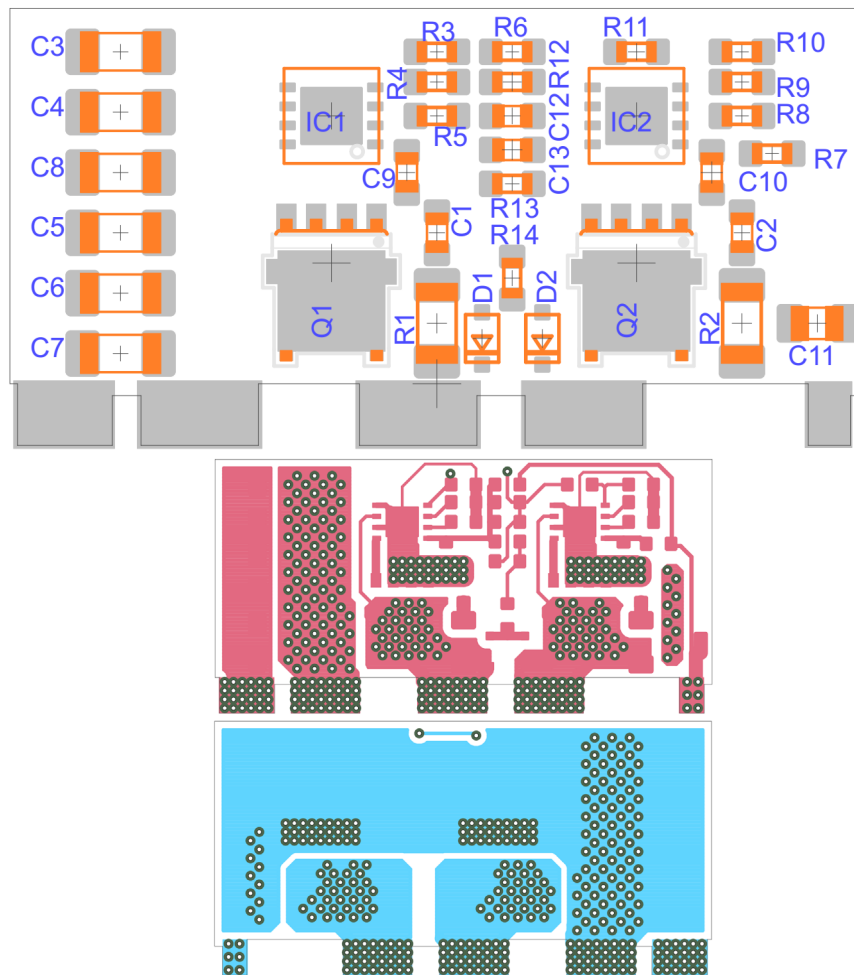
SR Module, Top Side Components, Top Layer – Red, Bottom Layer – Blue
